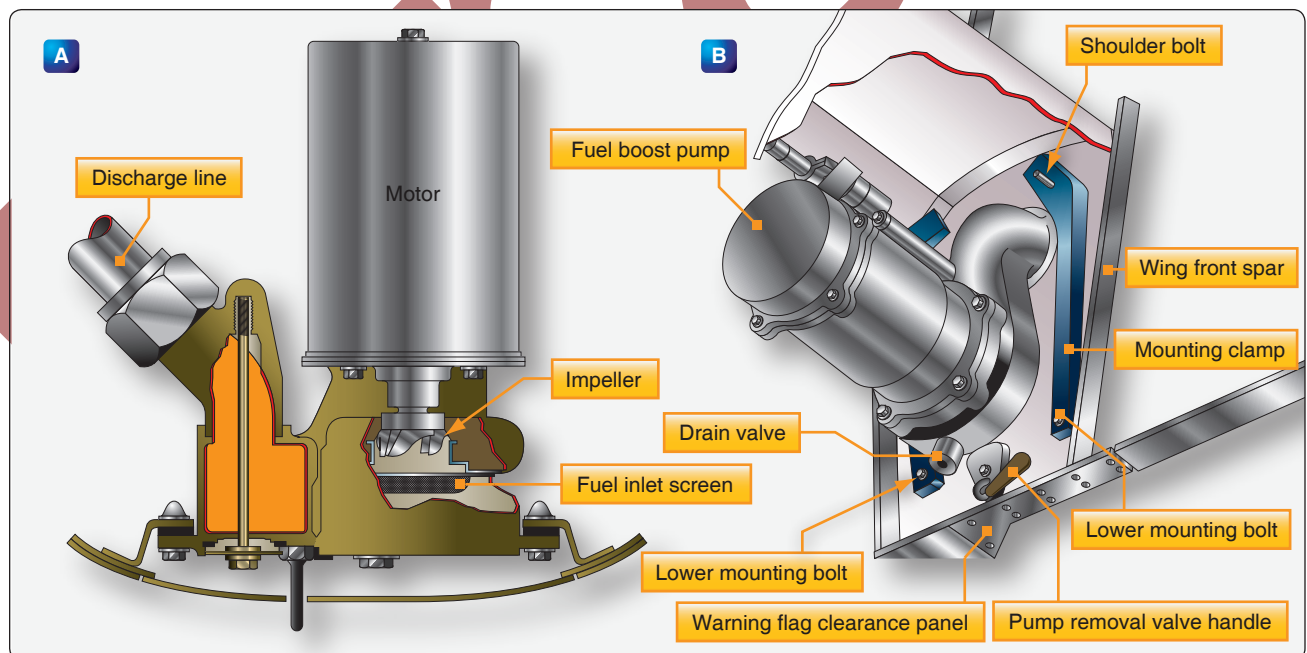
A centrifugal fuel boost pump can be submersed in the fuel tank (A) or can be attached to the outside of the tank with inlet and outlet plumbing extending into the tank (B). The pump removal valve handle extends below the warning flag clearance panel to indicate the pump inlet is closed.
